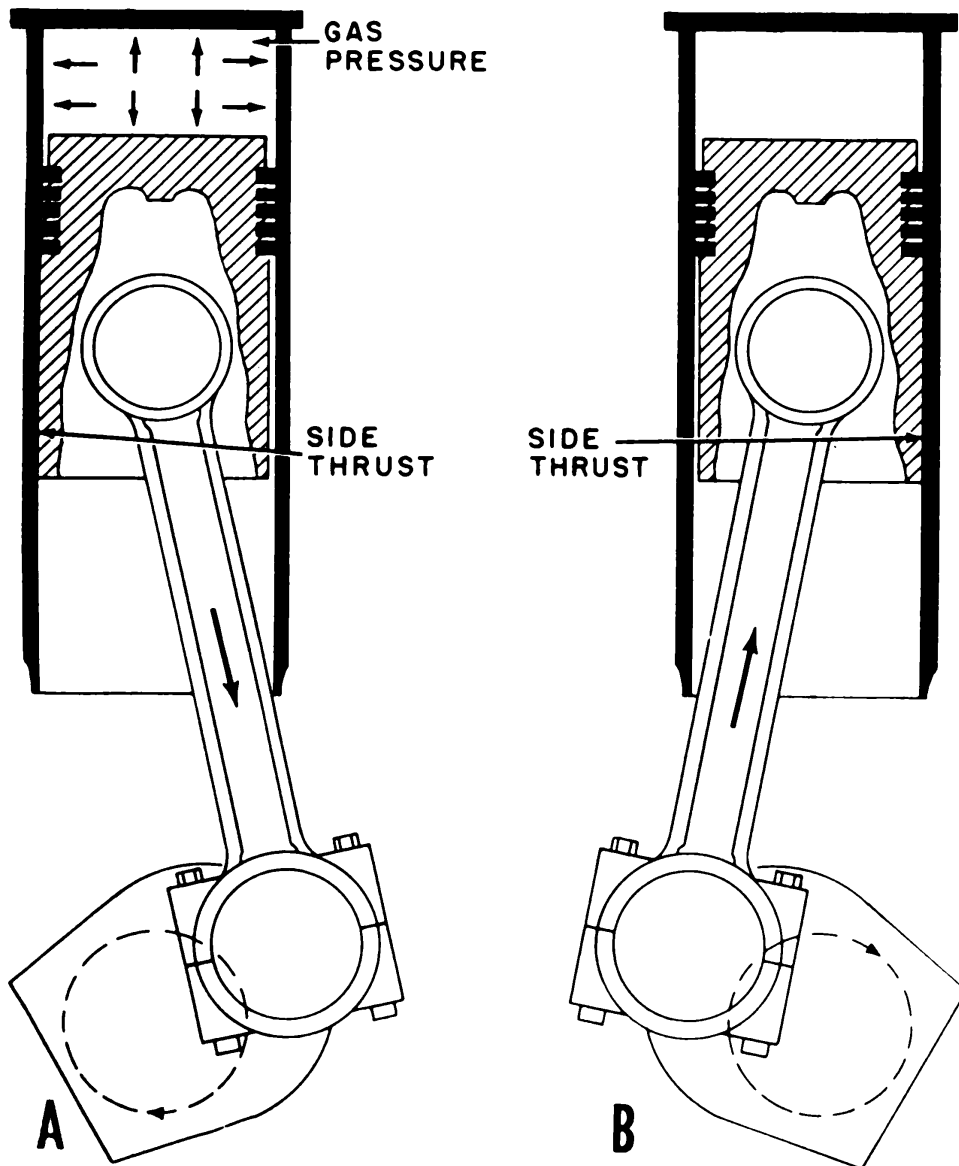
Side thrust—trunk type piston, single-acting engine.
